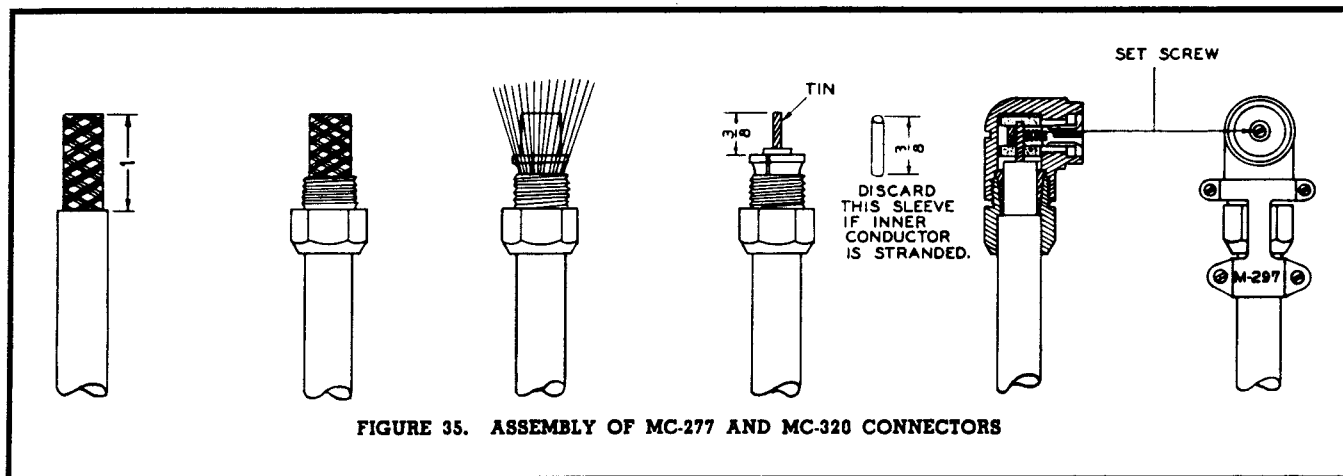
ASSEMBLY OF MC-277 AND MC-320 CONNECTORS
